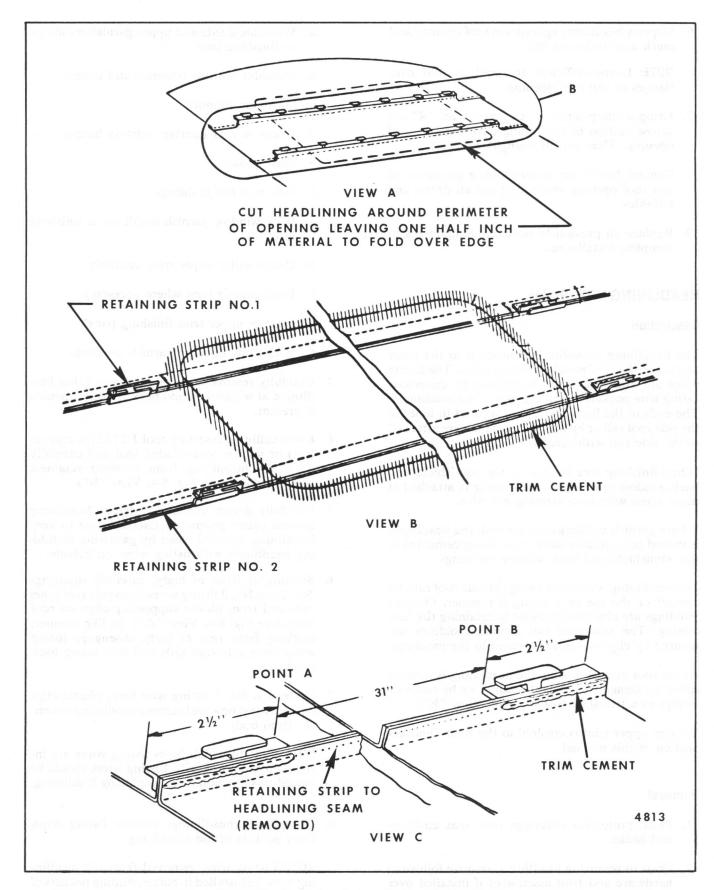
Headlining Installation - Styles with Vista Vent
